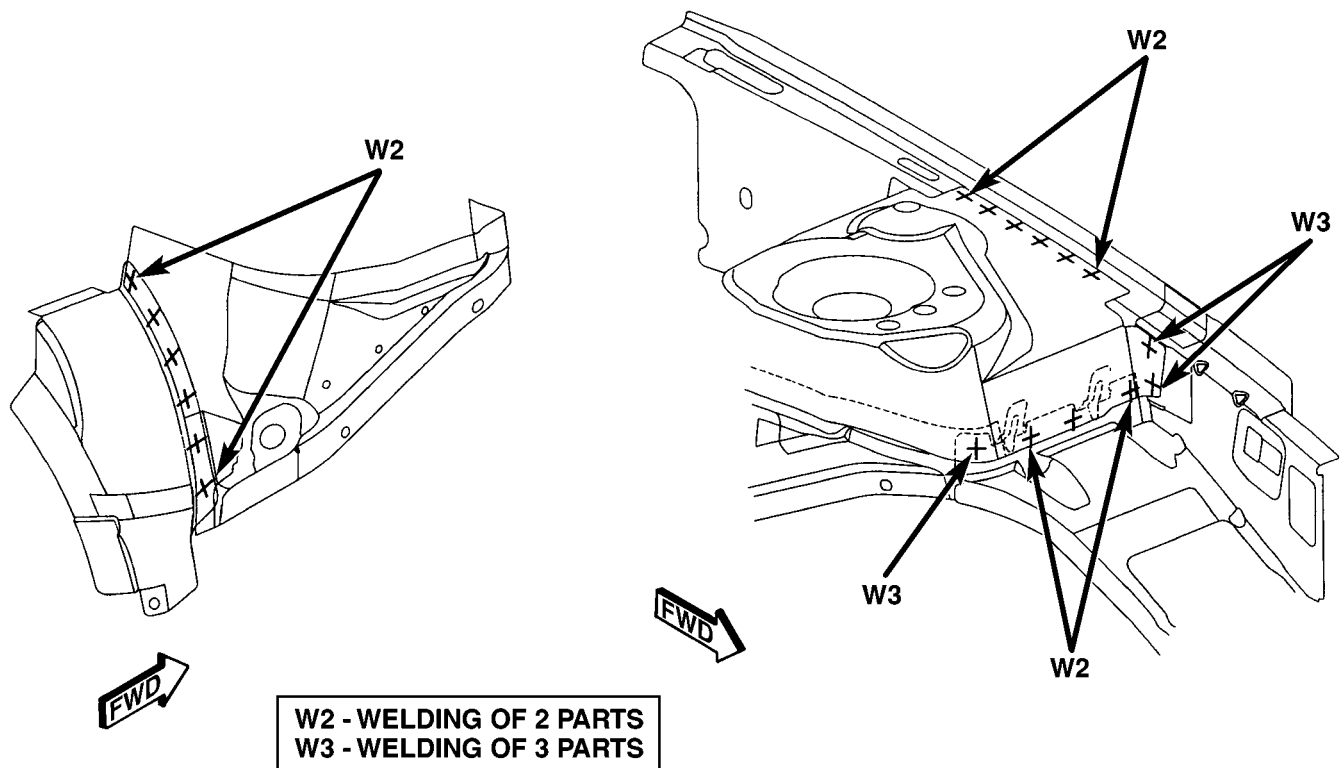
REAR FRONT SIDE RAIL TO REAR FRONT RAIL CAP
